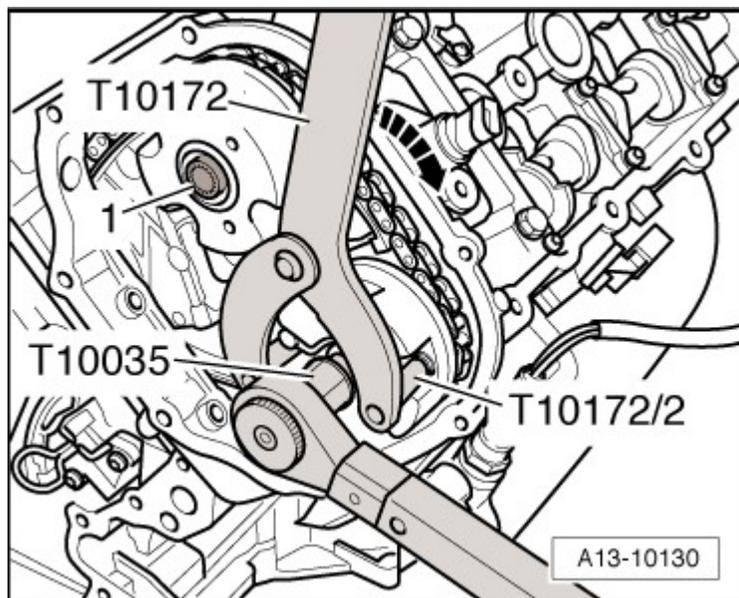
Removing/ Installing Left Camshaft Adjuster
